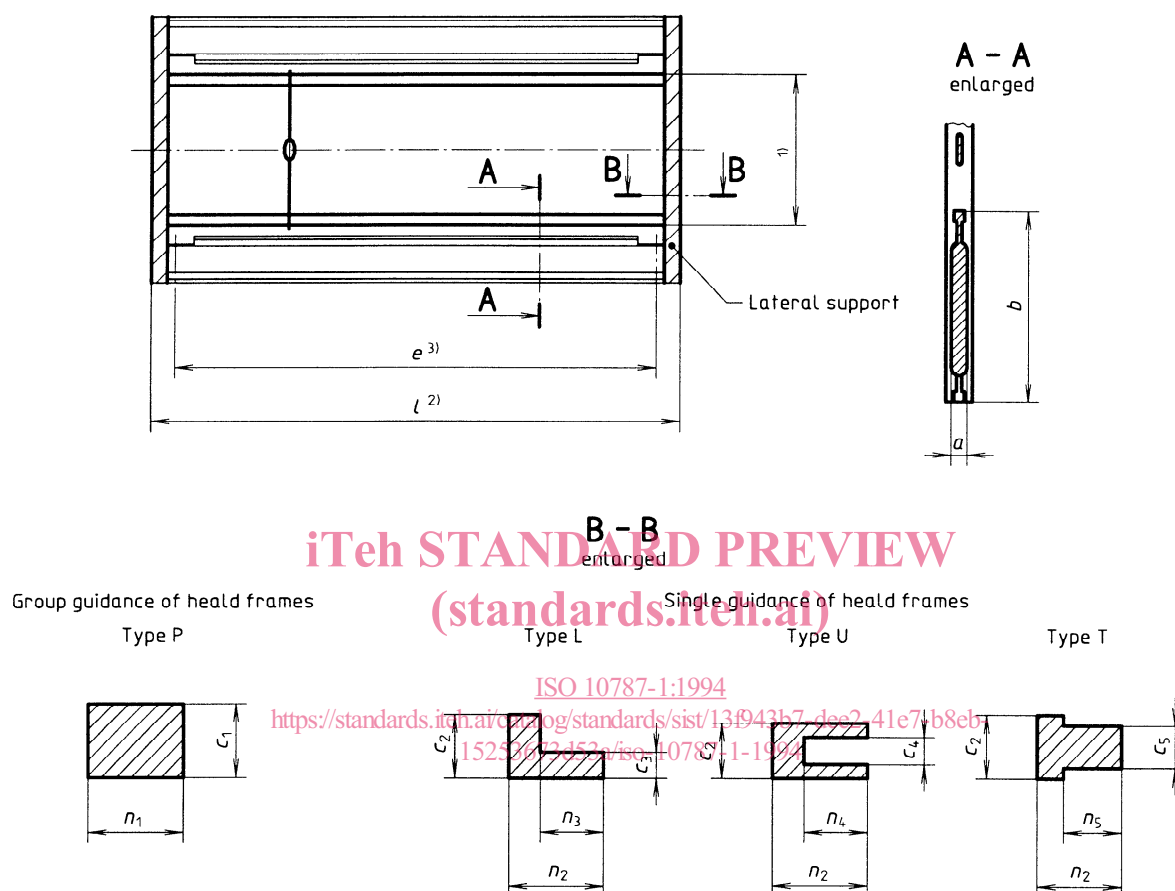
and 2 and table 1 define and specify the dimensions of heald frames on which the heald-carrying rod is fixed to the frame stave by rod support.
